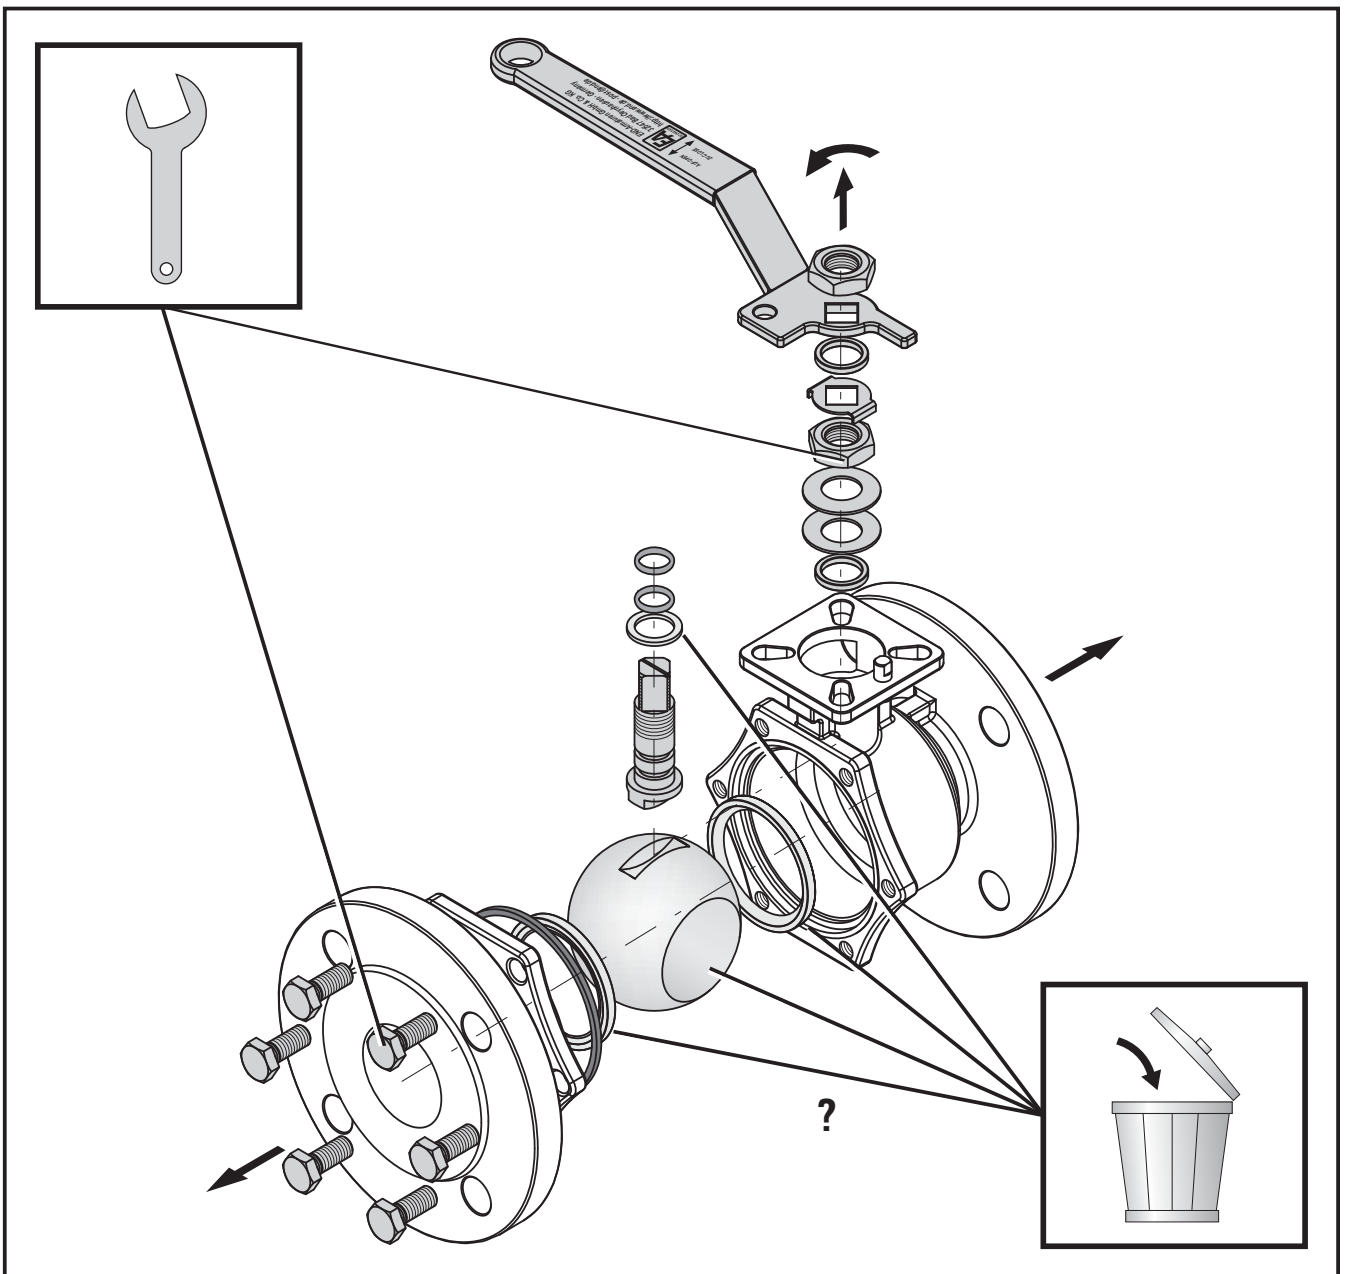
ball valves, replacement of the sealing kit: removal of the inner parts (Fig.: Art. ZP311007)
